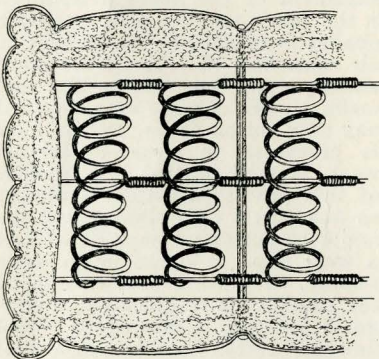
Inner spring type of mattress, showing roll edge, side stitching, padding, tufting cords and spring construction.
